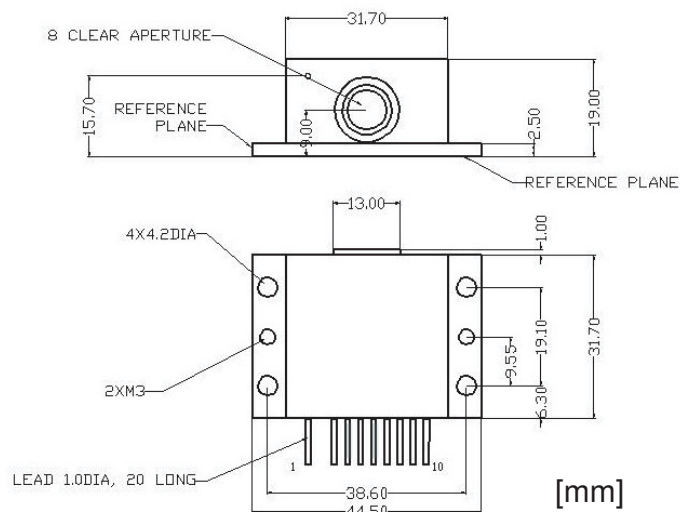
Support mounting for HHL-27 (specifications of the HHL-L module)
